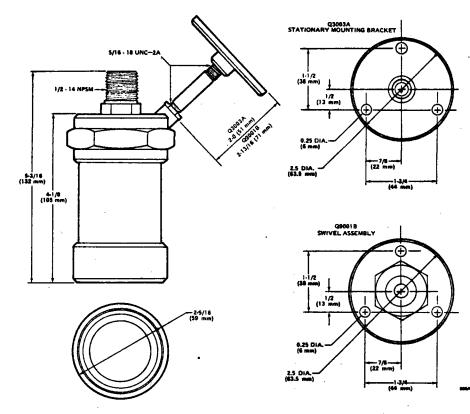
Mounting Dimensions of the Detector in Inches (mm).
